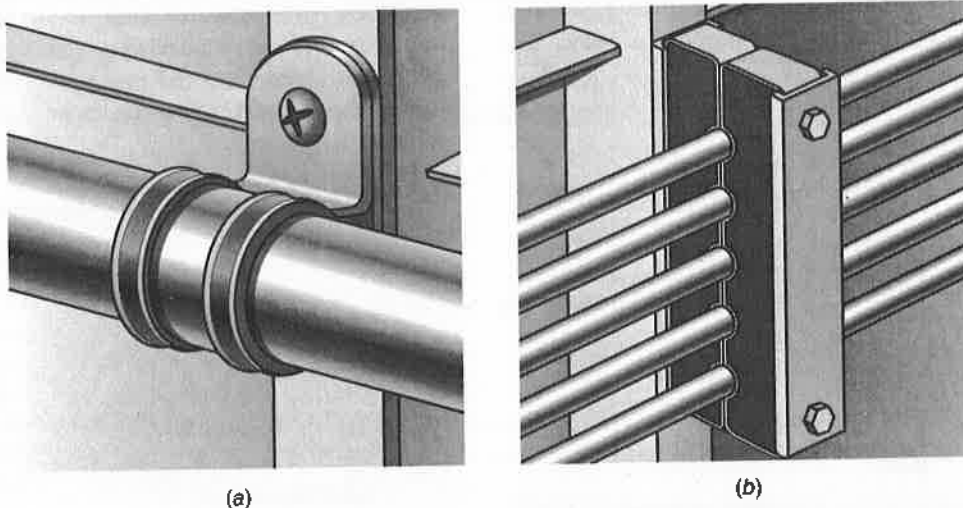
Bonding for tubular members: (a) clamps and (b) clamp blocks.
